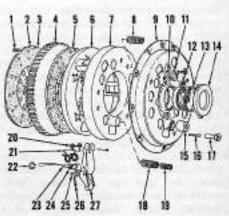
Exploded view of Borg and Beck continuous type clutch showing component parts and their relative positions.
